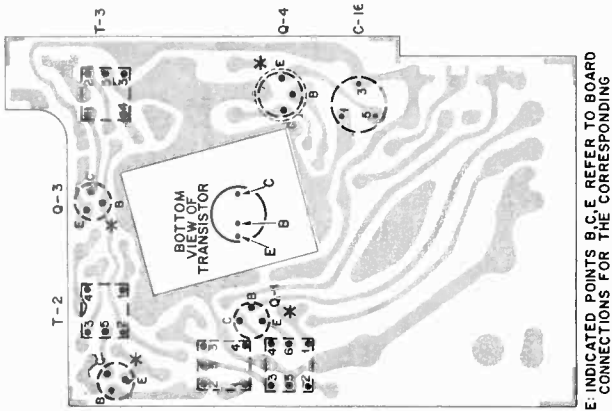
PRINTED CIRCUIT CHASSIS DIAGRAM (BOTTOM VIEW)
